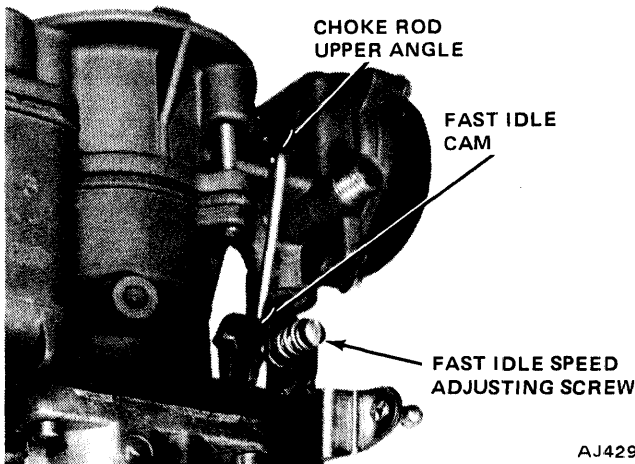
Fast Idle Cam Linkage Adjustment
